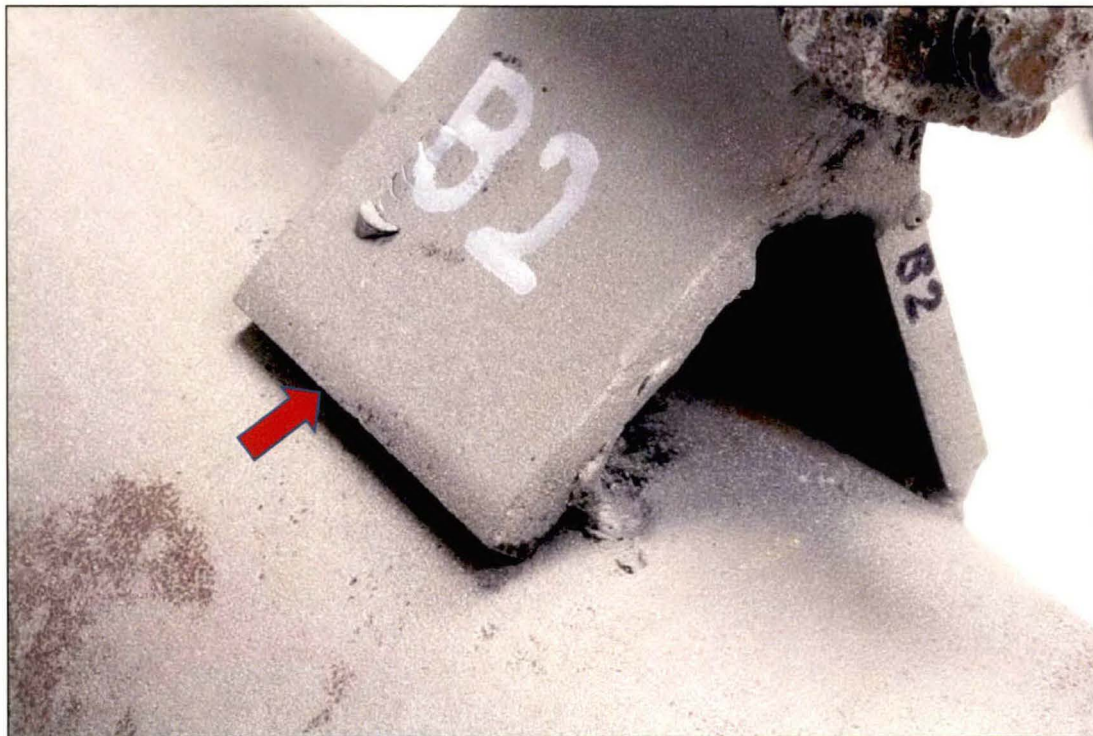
Oblique view of Lug B2 showing that there was no weld securing the bottom of the lug to the pipe (arrow).
